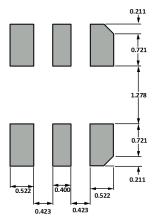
Suggested Solder Paste Stencil Pattern Layout
